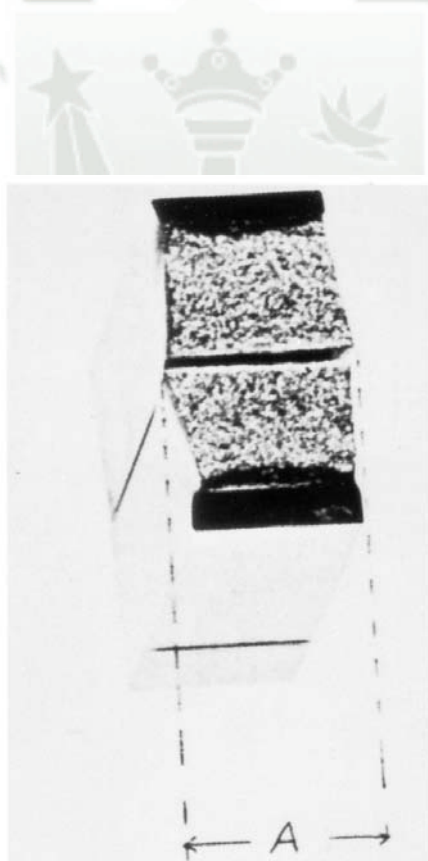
Halves of Broken Charpy V-Notch Impact Specimen Joined for Measurement of Lateral Expansion, Dimension A
